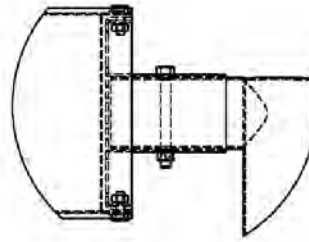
Connection Details for the Locking Architectural Mailbox.
